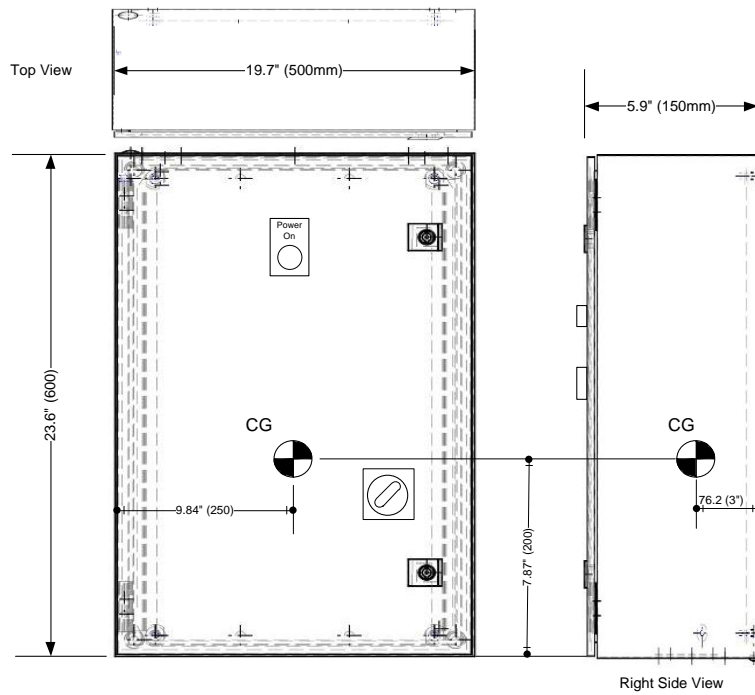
Enclosure Dimensions: Outside, Mounting, Depth
